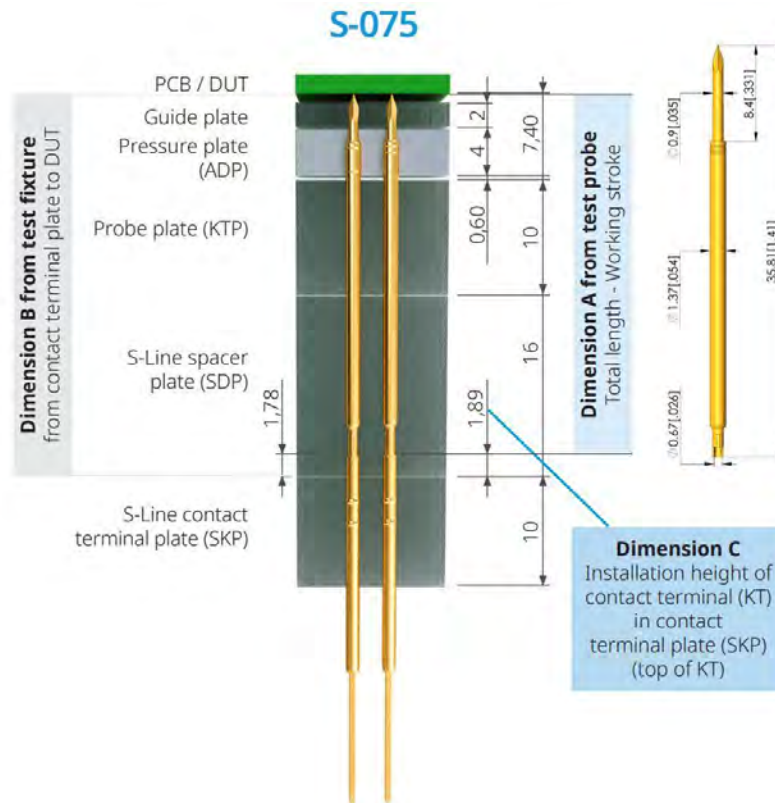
S-Line concept with required plates and dimensions. Example using wire-wrap probes
